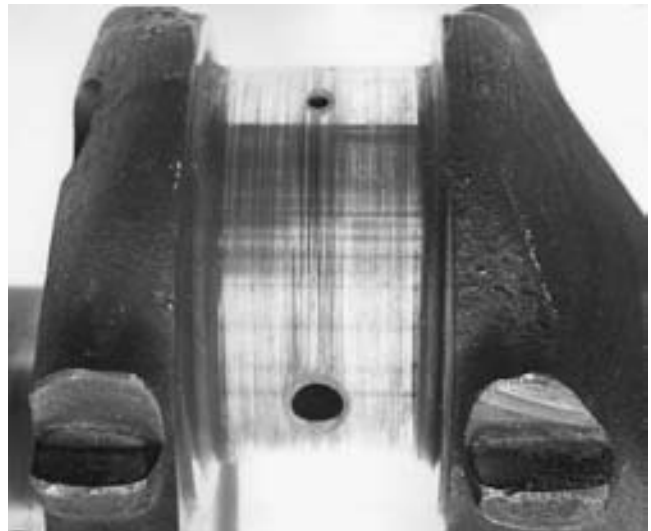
A cross-drilled crankshaft is used on some production engines and is a common racing modification.
